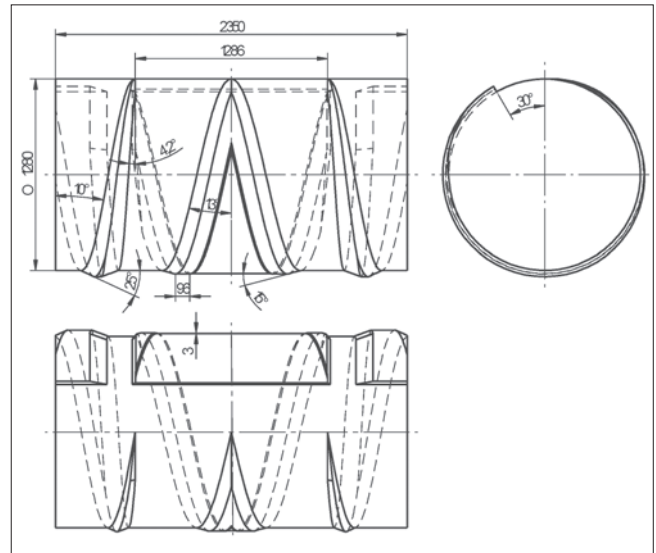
Wedge roller for shaping the railway axle with the most important dimensions marked
